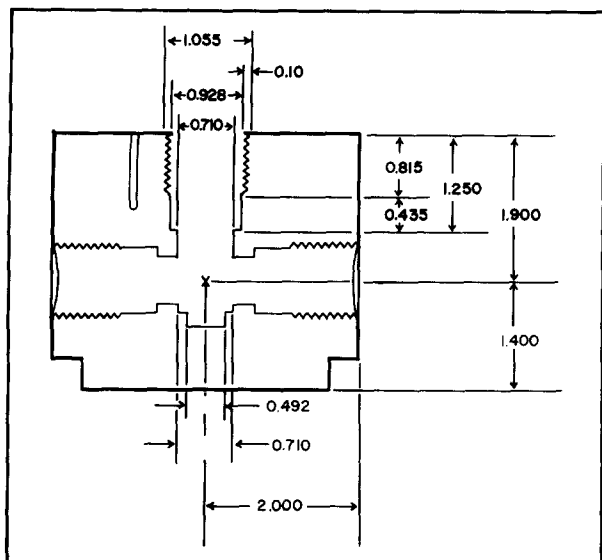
Side view diagram of the high pressure bomb. Tolerances omitted. In the critical places they were usually $+0.005$, and -0.000 .
